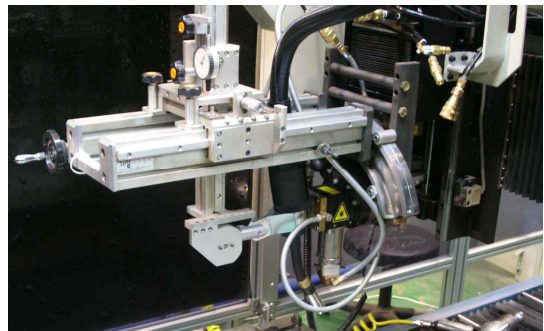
CO2 Laser-GMA hybrid welding system
